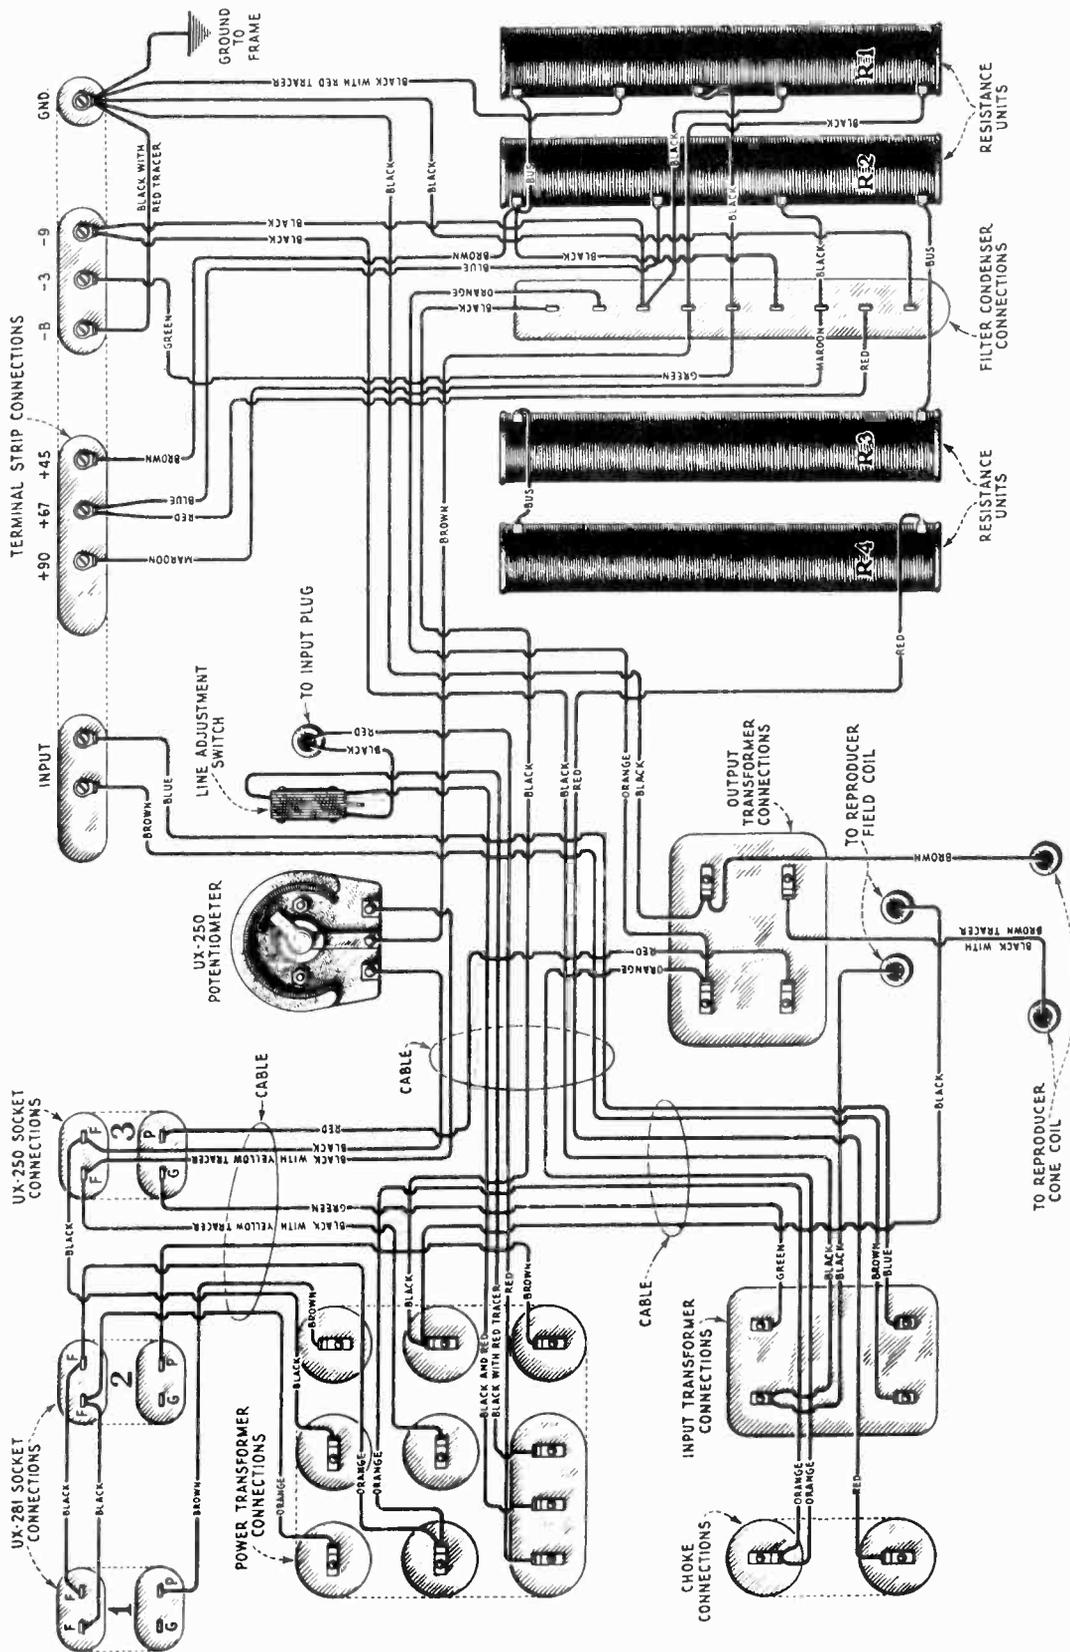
Sub-chassis assembly and continuity wiring diagram.
